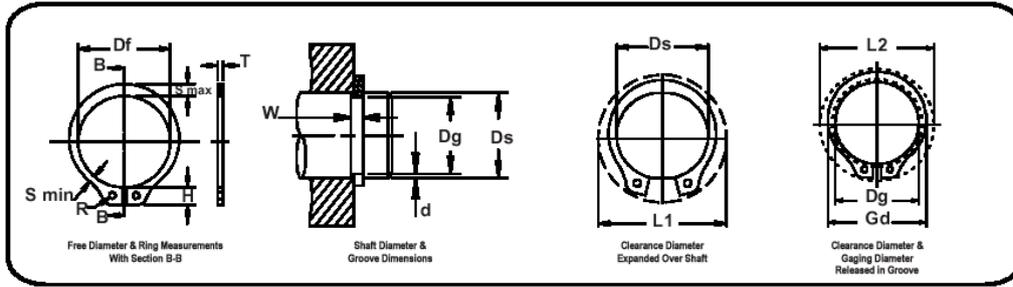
Snap rings which provide a removable shoulder to lock the components on shafts.
